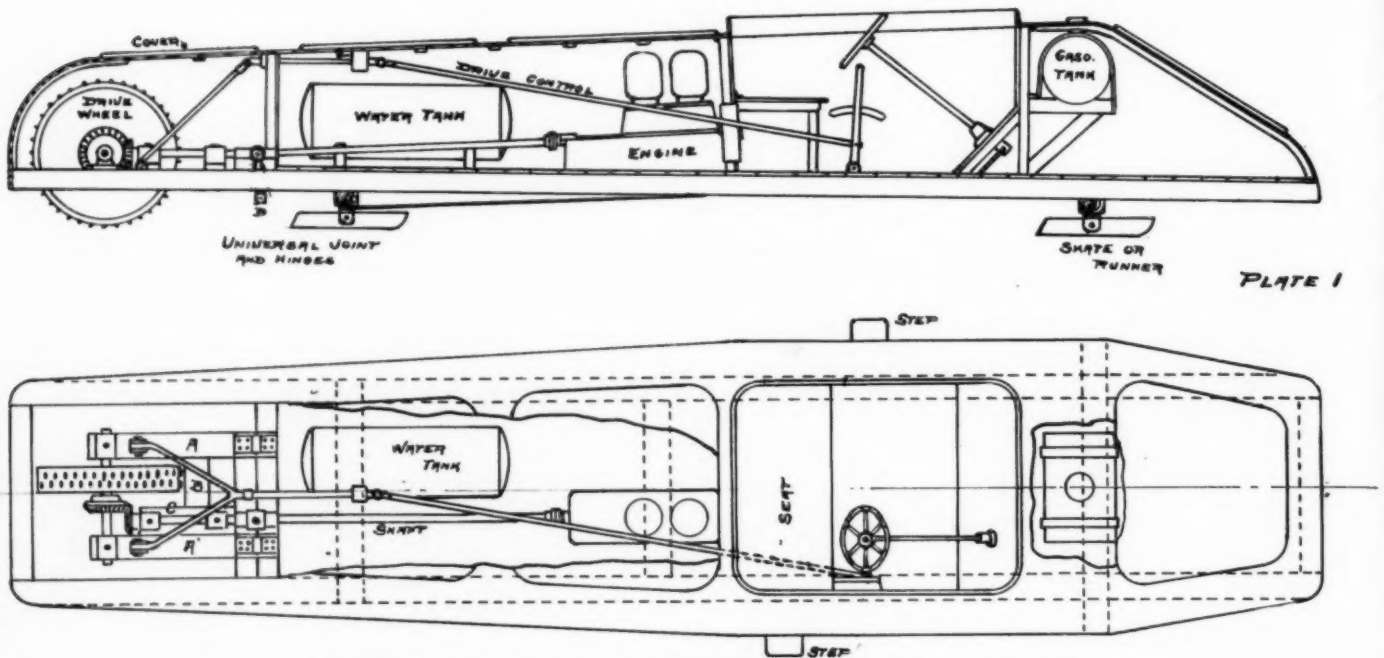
and Fig. 2. Elevation and plan showing construction of motor ice boat.
